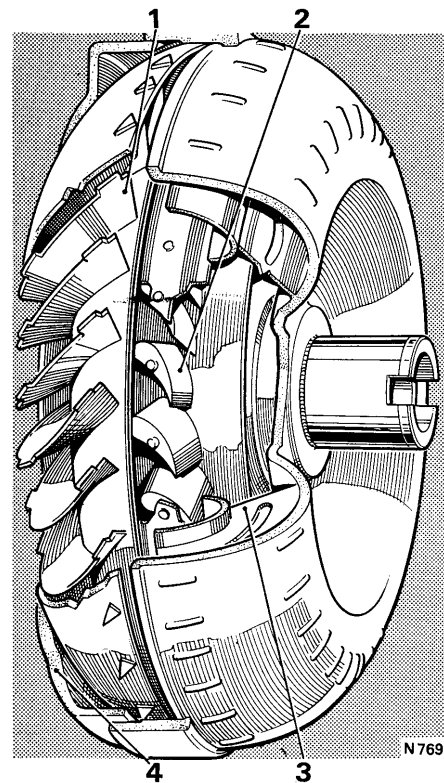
TORQUE CONVERTER—CUT-AWAY VIEW
